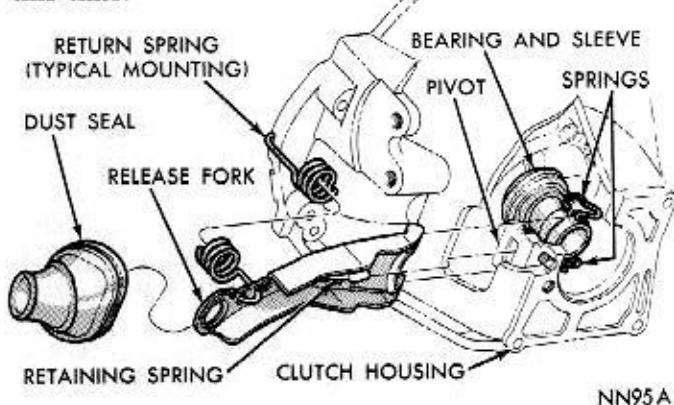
Clutch Release Fork, Bearing and Sleeve
